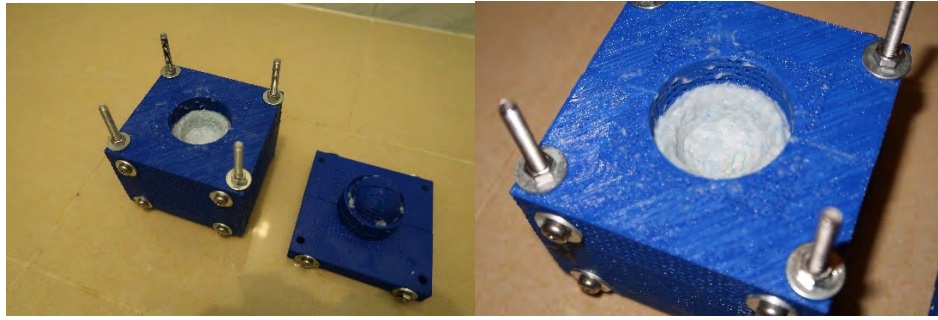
Pulp is poured into the cavity formed by the middle and bottom moulds, and compressed with the top mould (left). Close-up view of the pulp in mould after compressing (right).
